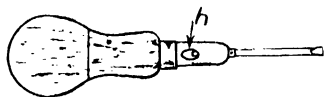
BRADAWL WITH REMOVABLE BLADES
